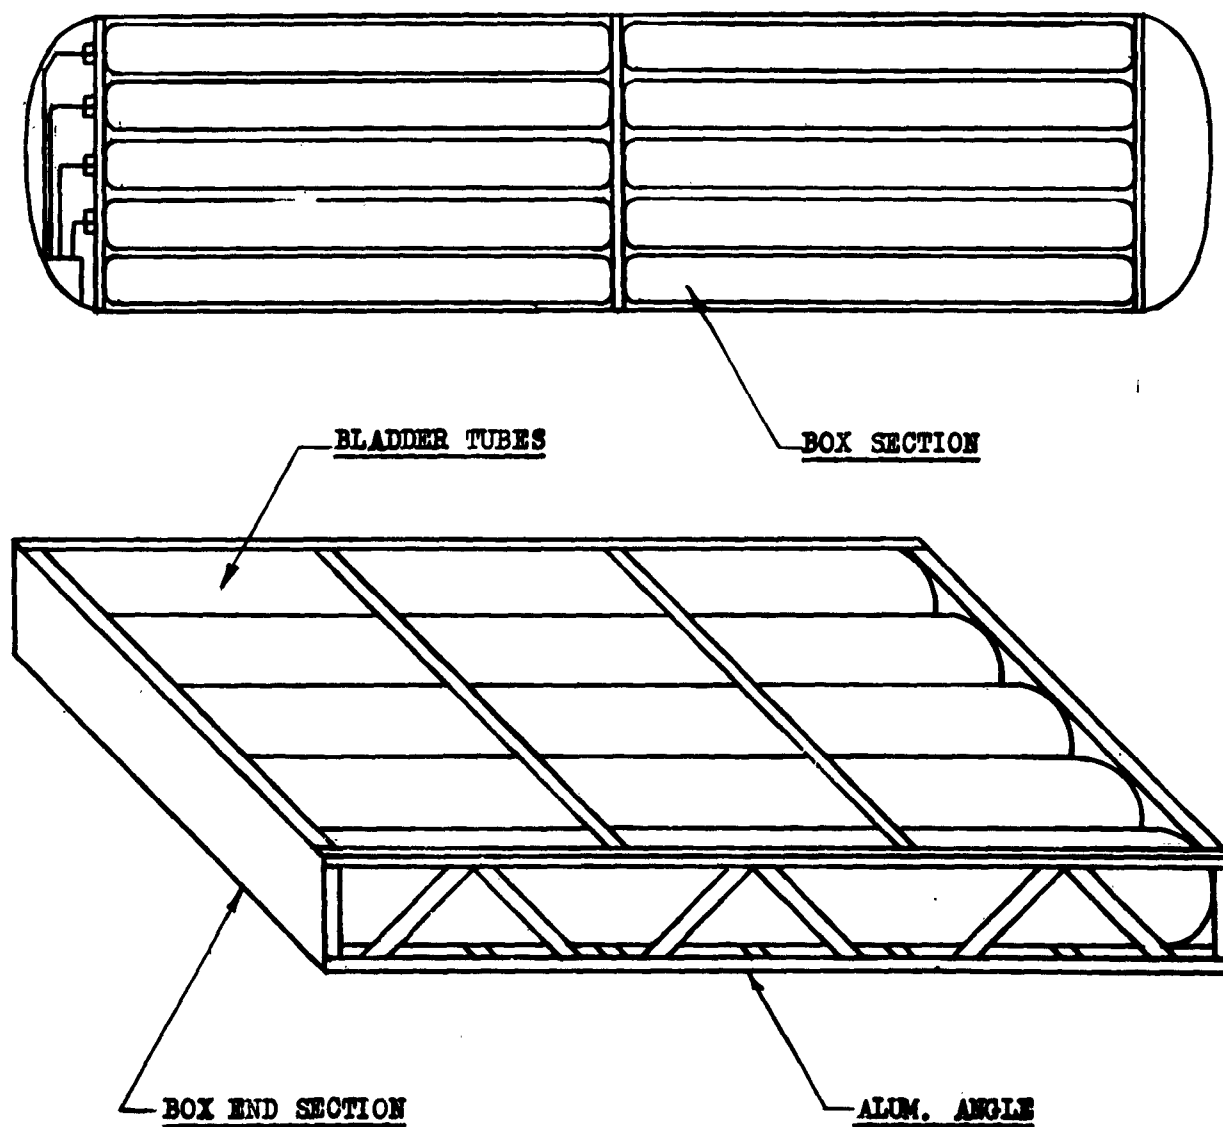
HORIZONTAL BLADDER TUBE TANK, DESIGN FOUR
